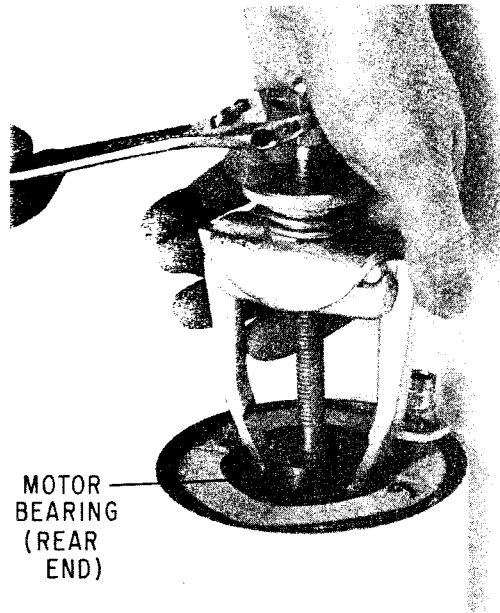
REMOVING MOTOR BEARING (REAR END)
